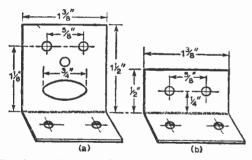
(a): A bracket for mounting large relays; (b); dimensions of a bracket for a Siemen's relay.
